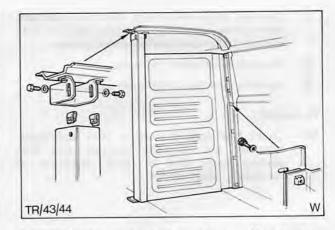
Partition panel and rail assembly to roof bow bracket and bodyside retainer
